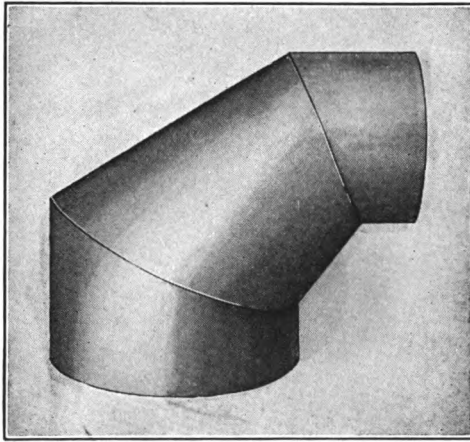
Photographic View of Three-pieced Tapering Elbow.
